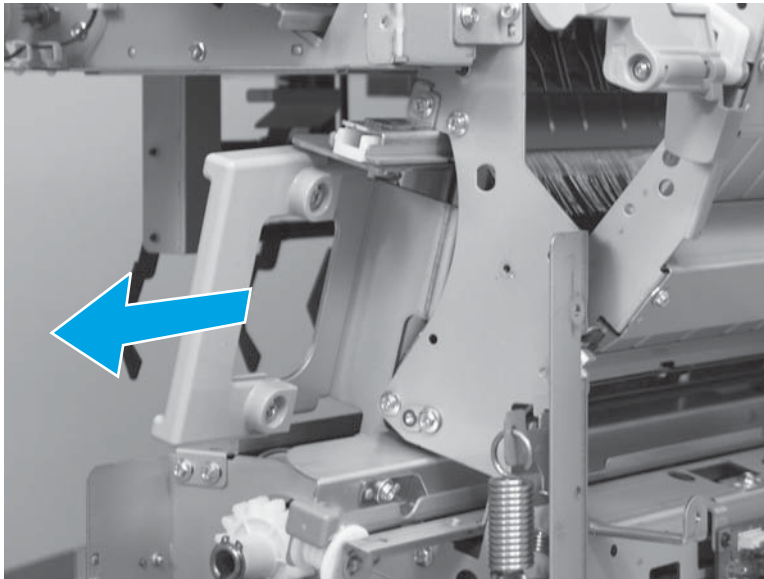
Remove the saddle guide assembly (5 of 5)
